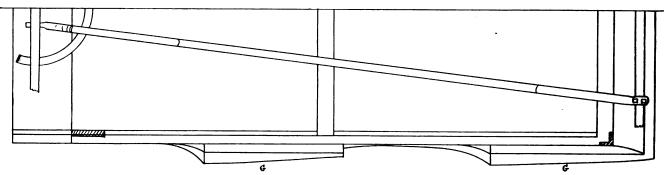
SHOWING HALF PLAN OF BOTTOM OF SURRY.
